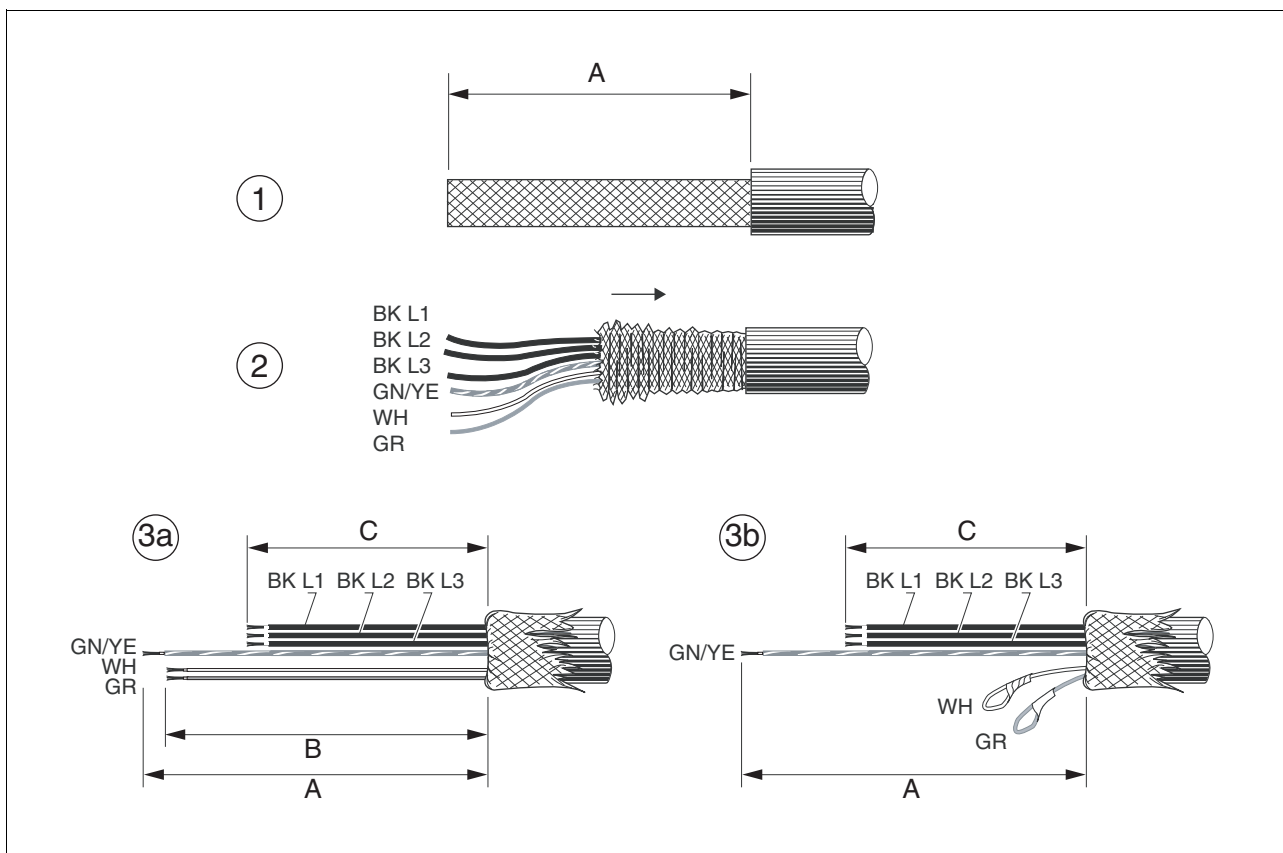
Steps (1-3) for fabrication of the motor cable
